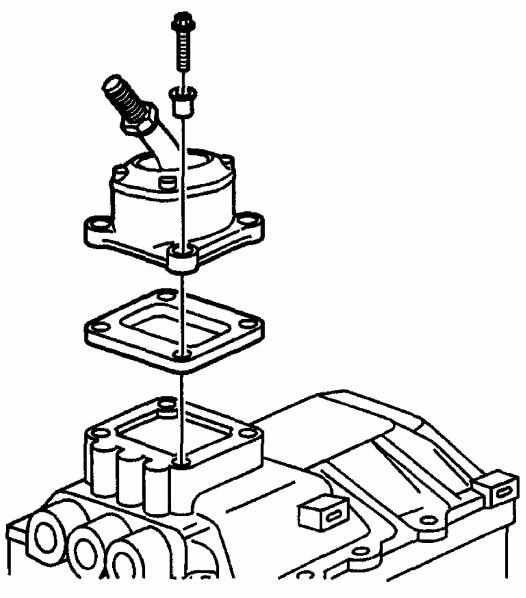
Installing Shift Housing-To-Transmission Bolts
